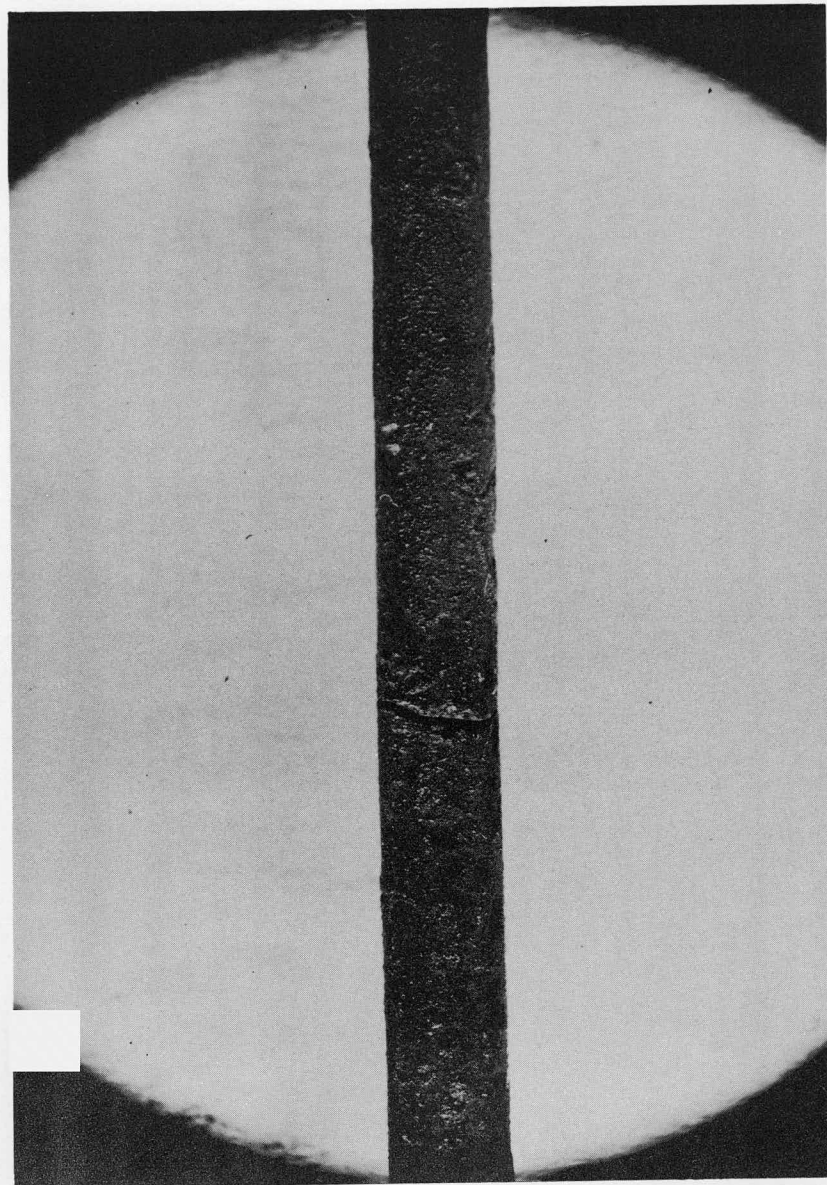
Corrosion Wire from Feed Stream Pipe. Crack 7 ft 3 in. from Outlet (Hot) End. (5X)
